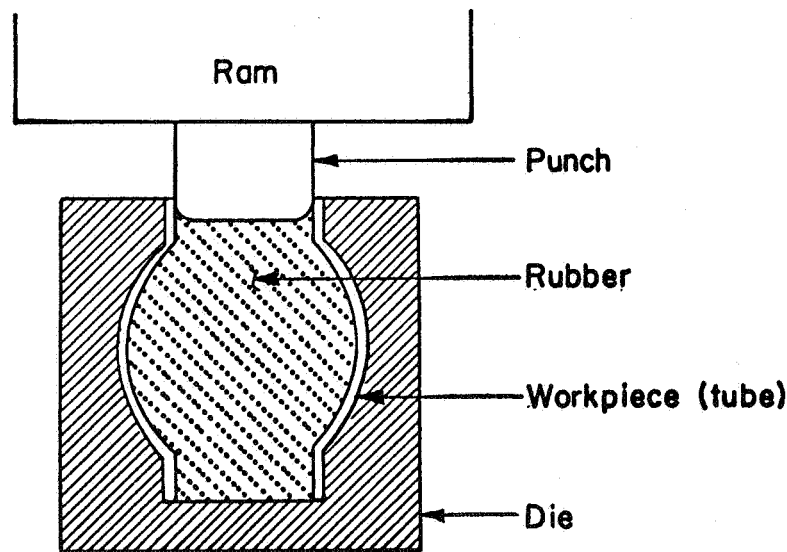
RUBBER-BULGING SETUP (REF. 34)
